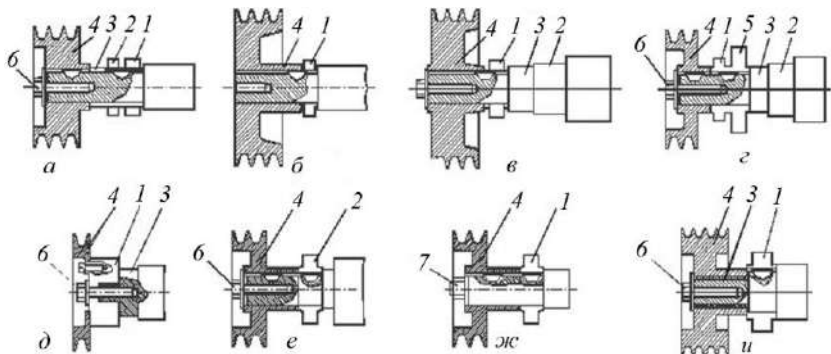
Typical designs of the front ends of crankshafts: *a, d, g* – installation and fixation with a bolt and keys; *b* – fixation by friction force (press fit); *d* – installation of the protrusion on the part into the groove at the end of the shaft; *w* – fixing with a nut; *and* – installation of parts on slots; 1 – asterisk (pulley); 2 – oil pump drive sprocket (splines); 3 – sleeve or surface anterior omentum; 4 – pulley (vibration damper); 5 – sprocket (pulley) drive additional shafts; 6 – bolt; 7 – nut
